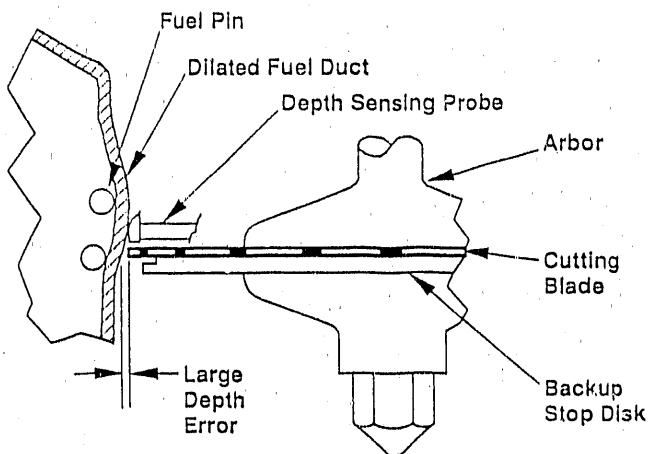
A. Cutting on Slope of Dilation Causes Large Depth Control.
